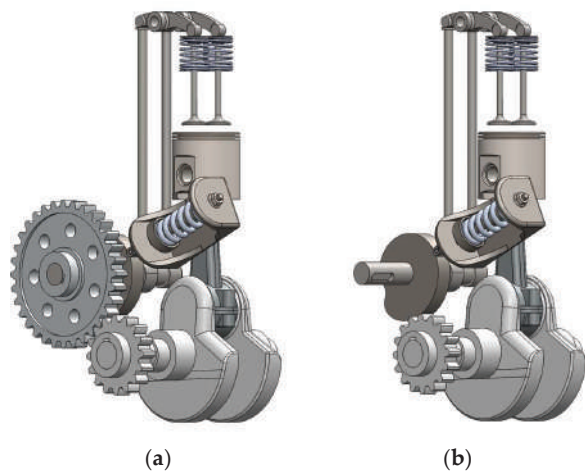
Perspective views—left side—of the CAD model from the (a) mechanism integrated on the single-cylinder engine, in image (b), the camshaft gear was removed to show the positioning of the balancing cam.
